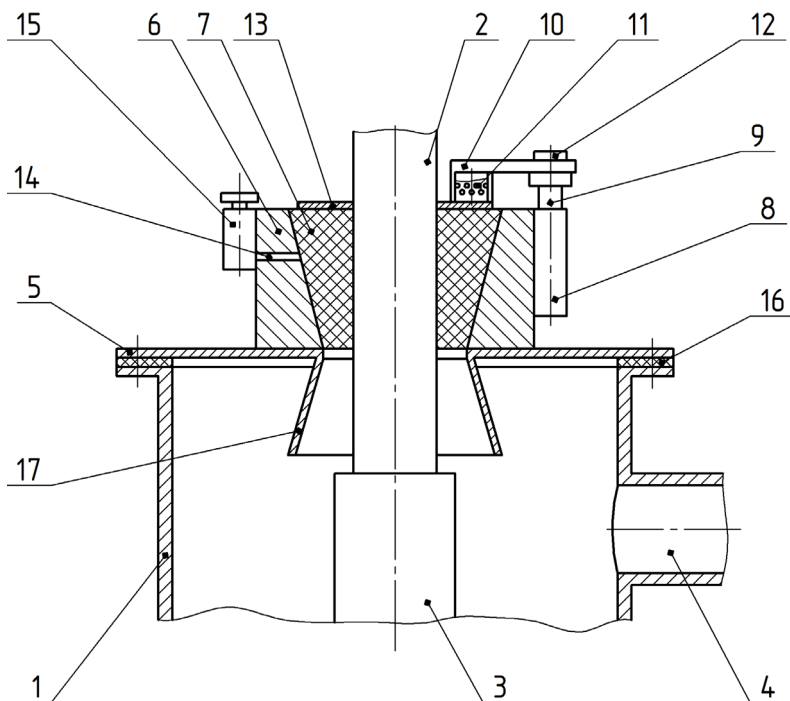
Wellhead sealing device for drilling large-diameter water wells
